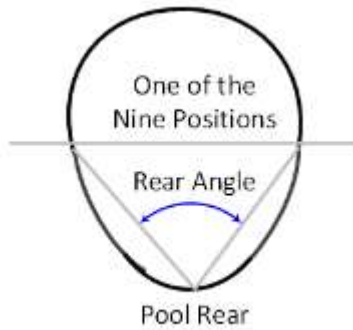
Pool rear angles/features as the inputs of neural network based weld penetration monitoring using weld pool geometrical appearance [153].
